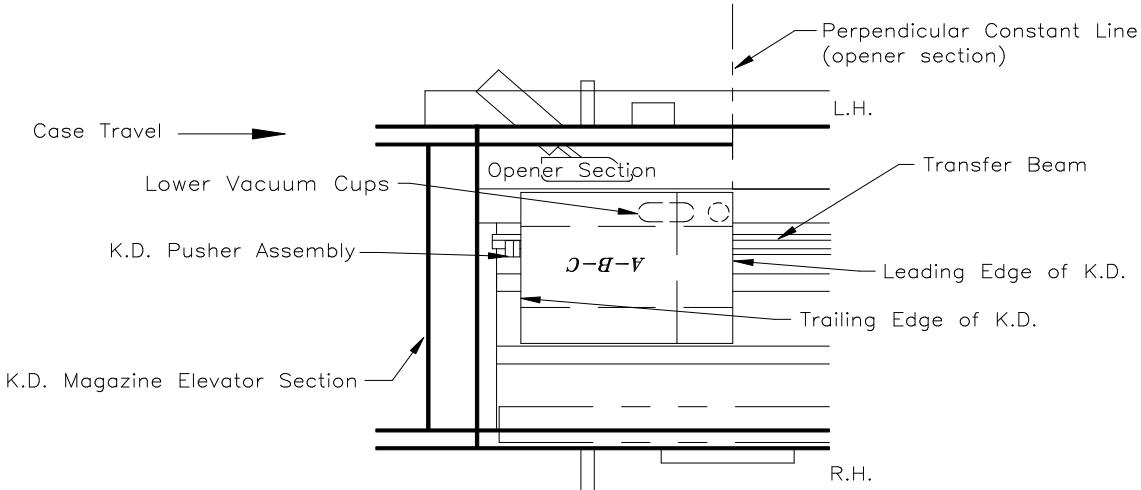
ADJUSTING K.D. PUSHER ASSEMBLY
